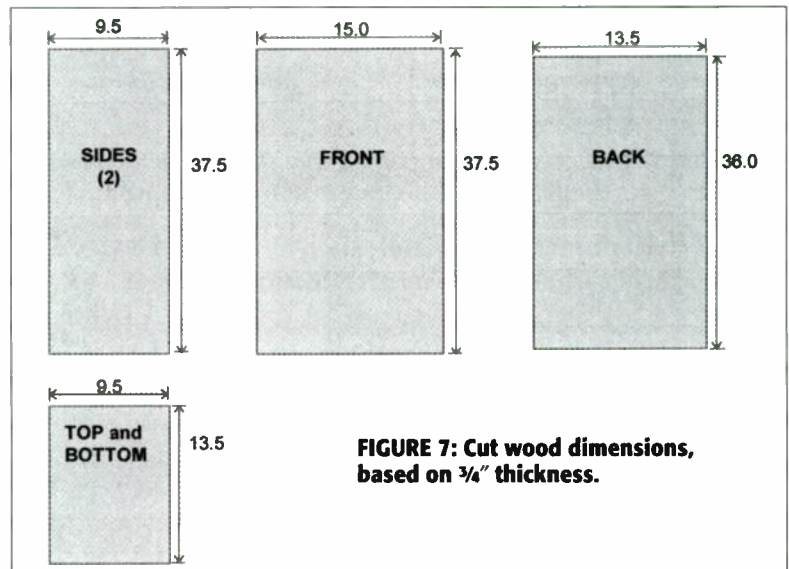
Cut wood dimensions, based on 3/4" thickness.
